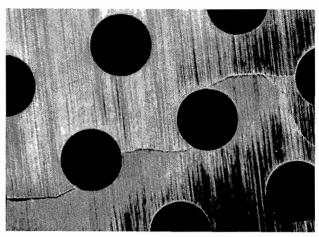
13. Corrosion fatigue cracks in a paper machine suction roll shell.
